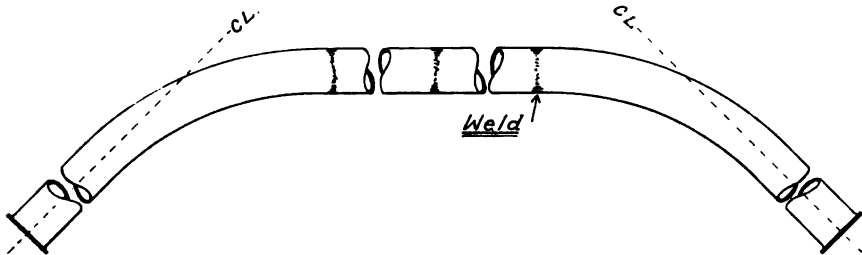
WELDS INSTEAD OF JOINTS IN PIPE BENDS
